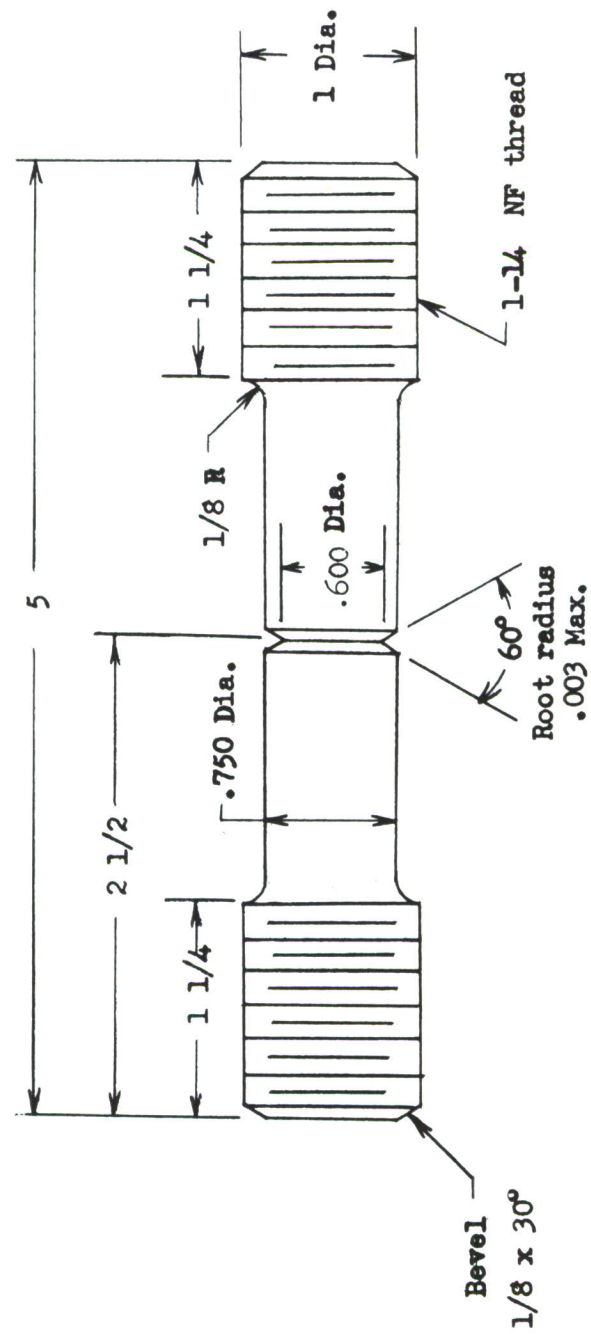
Plane-Strain Fracture Toughness Test Specimen
